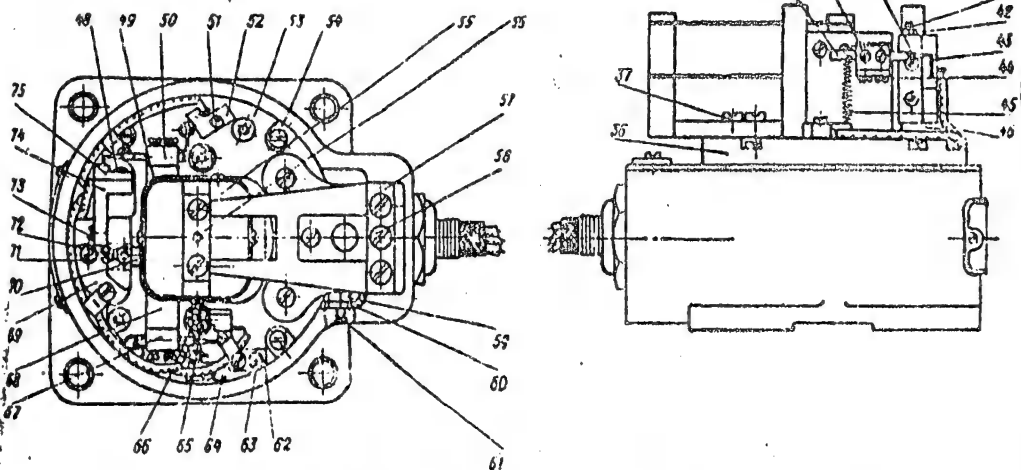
Cut-Out and Sectional Views of Overload Warning Unit
